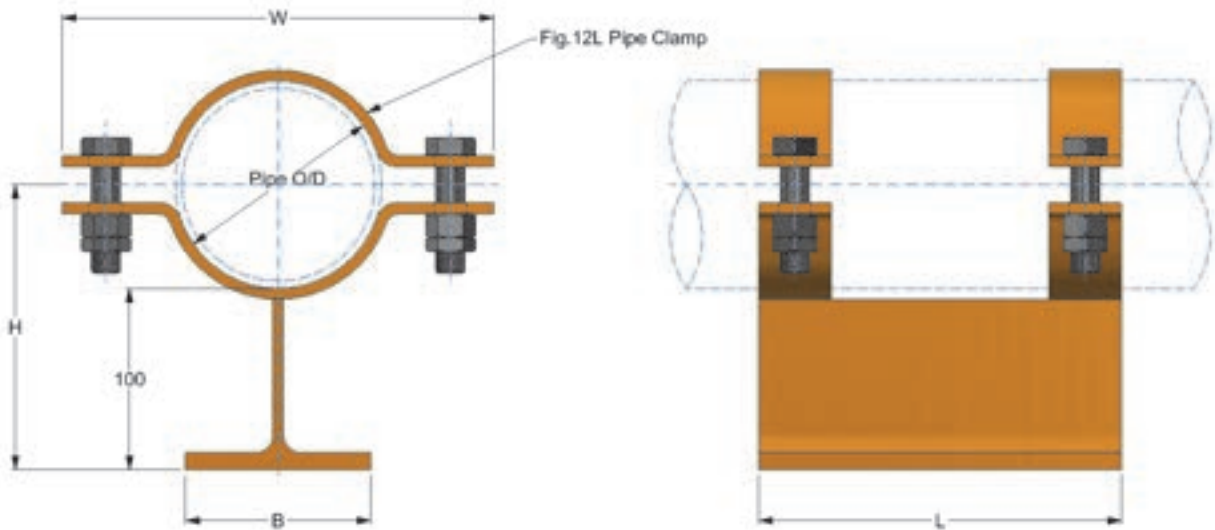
Clamped Pipe Shoe (150NB & Below)
